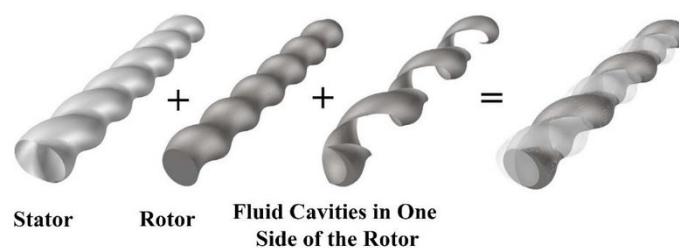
3D configuration of pump rotor, stator, and fluid cavities on one side of the rotor [44].
